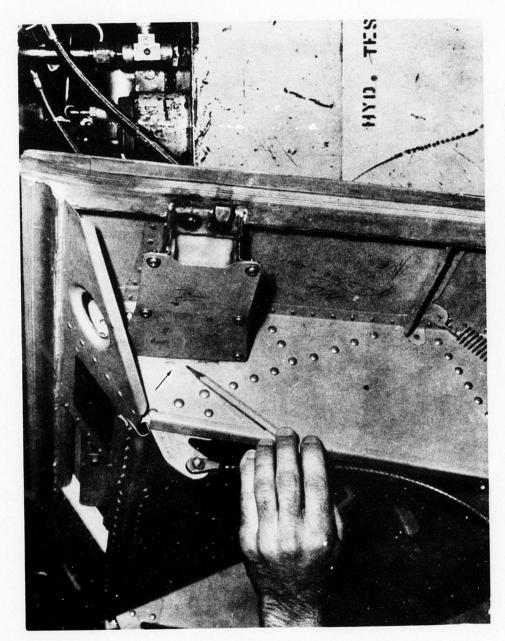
Lower Personnel Door, Side Beam Fatigue Crack,
